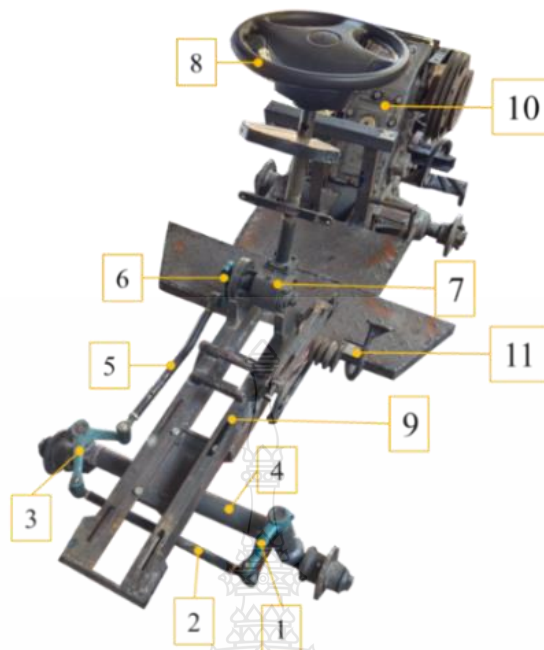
Chassis Components. (1) Knuckle arm; (2) Tie Rod; (3) Drag Link; (4) Front Axle; (5) Longitudinal Tie; (6) Pitman Arm; (7) Steering Gear; (8) Steering Wheel; (9) Main Chassis; (10) Wheel Gear Block; (11) Brake.
